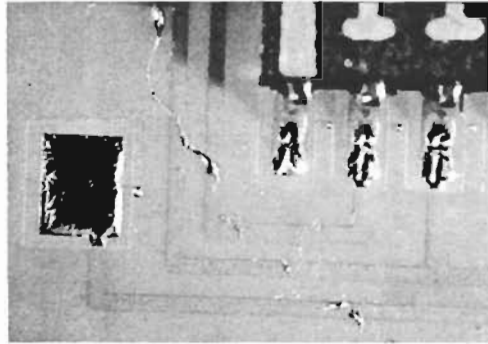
Solder balling 'snail trails' after CS soldering (EPS)
